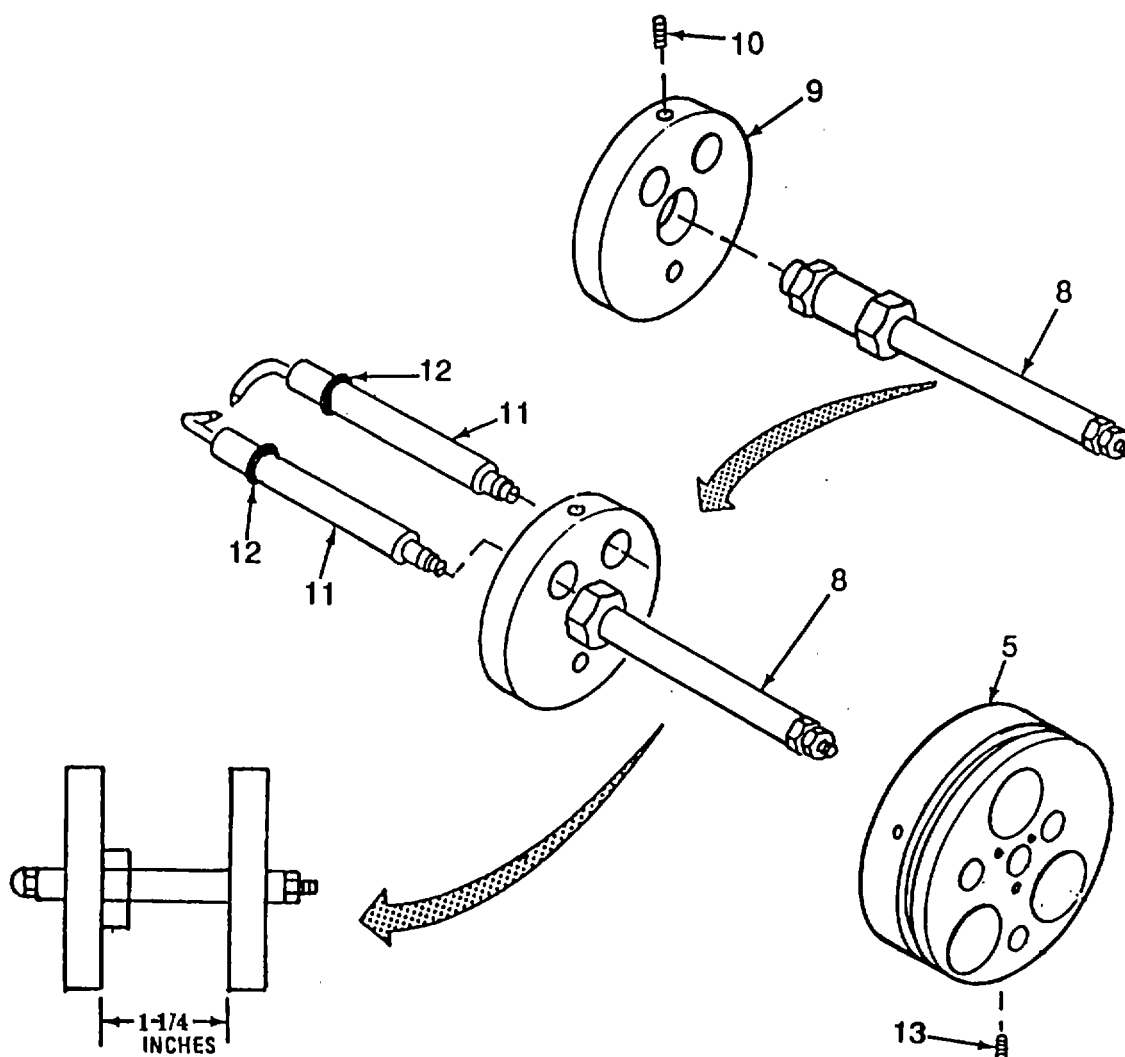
Burner Assembly (Sheet 2 of 5)
